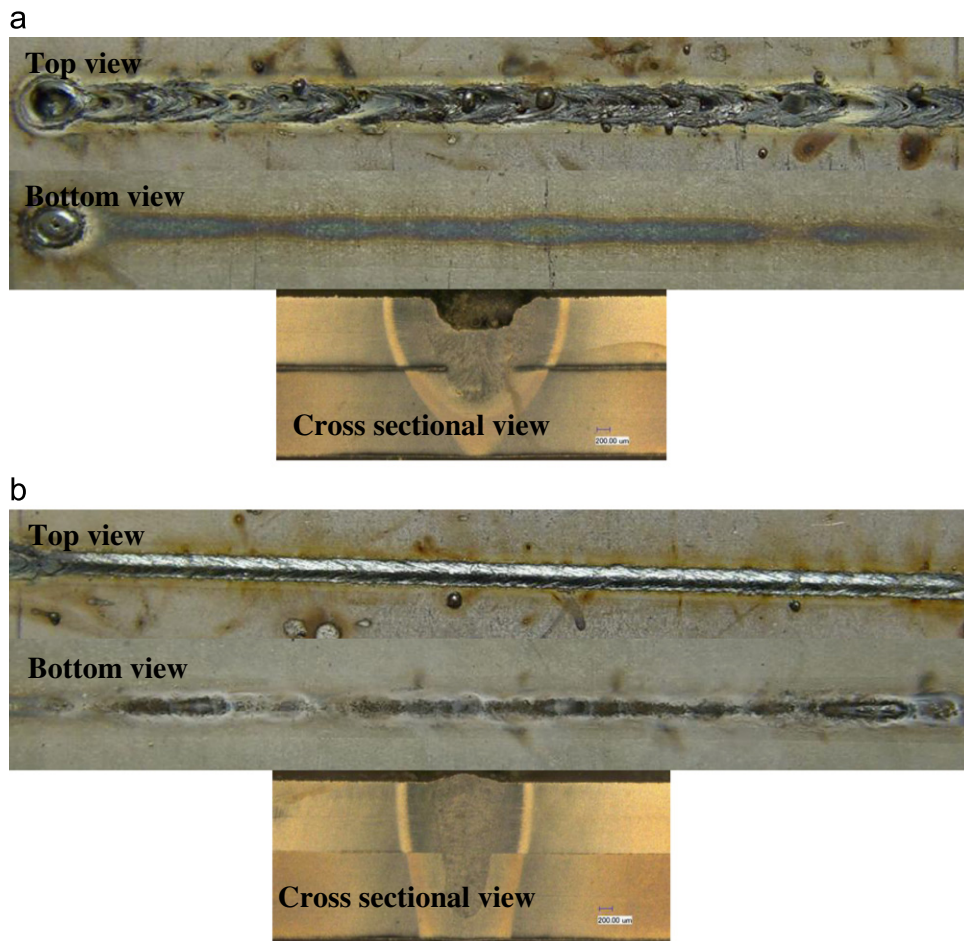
Top, bottom and cross-sectional views of overlapped joints by using laser welding with a welding speed of 30 mm/s and a laser power of 2.5 kW. (a) Top, bottom and cross-sectional views of lap joint with thickness of 1.2 mm to 1.5 mm with zinc at the faying surface. (b) Top, bottom and cross-sectional views of lap joint with thickness of 1.2 mm to 1.5 mm without zinc at the faying surface.
